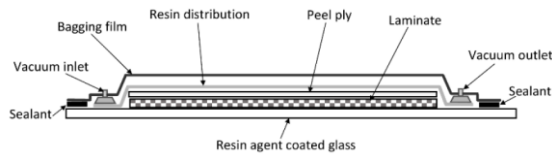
Vacuum assisted resin transfer molding (VARTM) (Bozkurt *et al.*, 2018)
